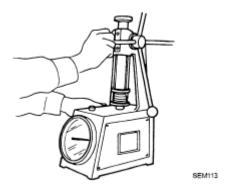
Checking Valve Spring Pressure Courtesy of NISSAN MOTOR CO., U.S.A.
